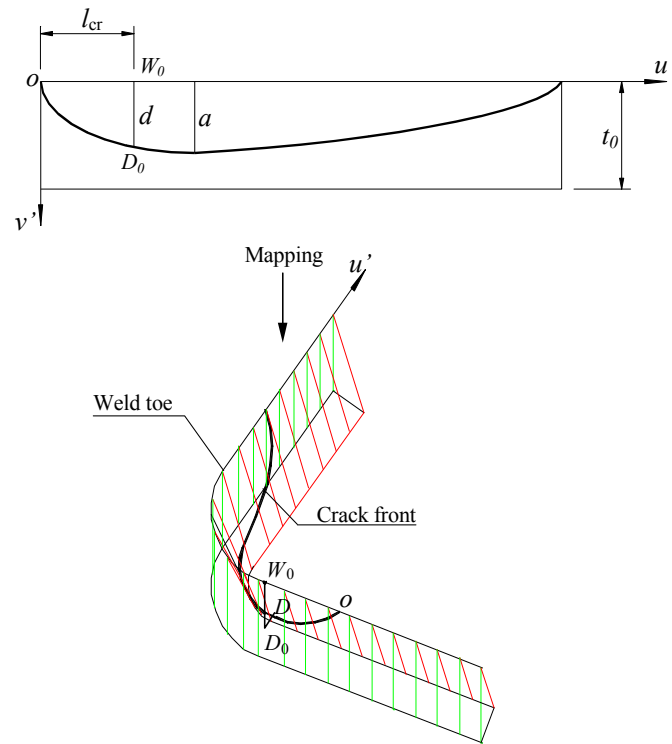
Modelling of the Surface Crack under the Weld Toe
